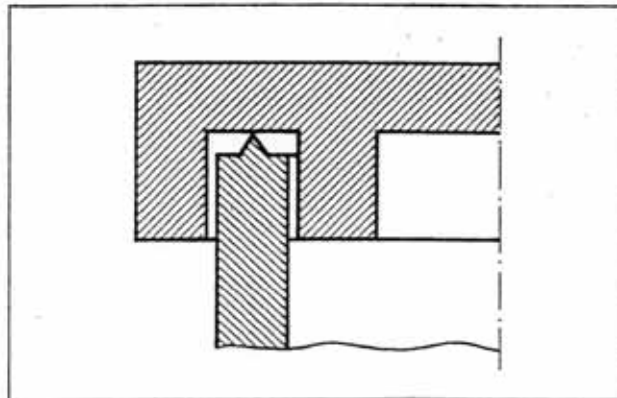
Upper part with double-centring. Because of the requirement of high dimensional stability preferably only used with fairly small moulding dimensions.
